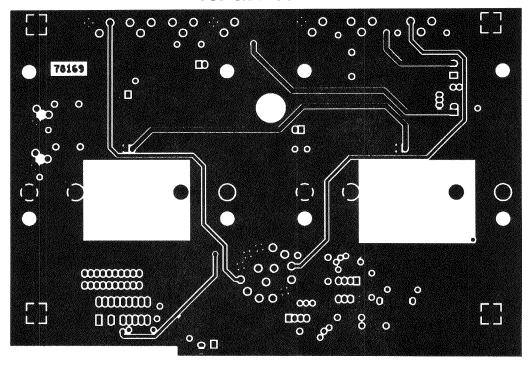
METER SWITCH BOARD COMPONENT LAYOUT
